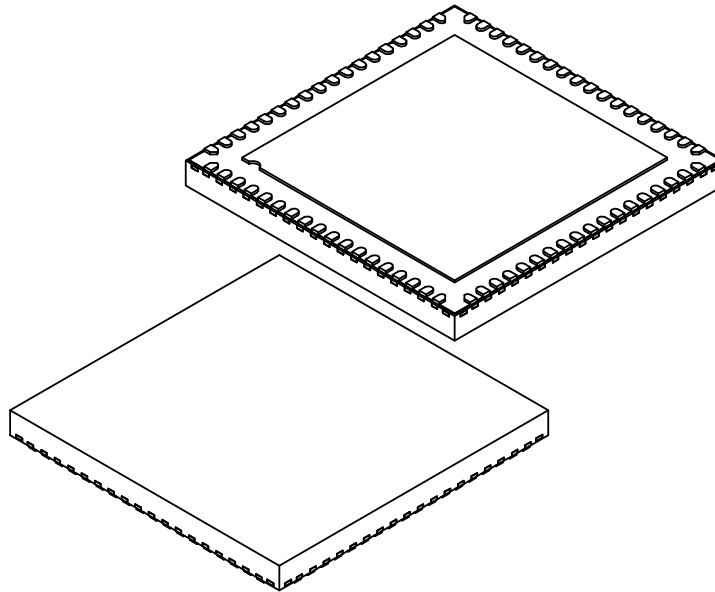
72-VQFN PACKAGE (DRAWING)
